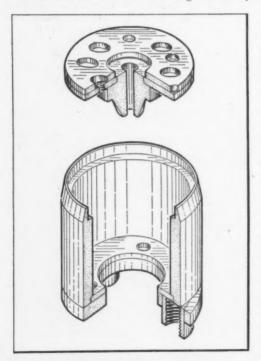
Mild-steel Solenoid Case and End Plate Produced by a Combination of Projection Welding and Copper Brazing
